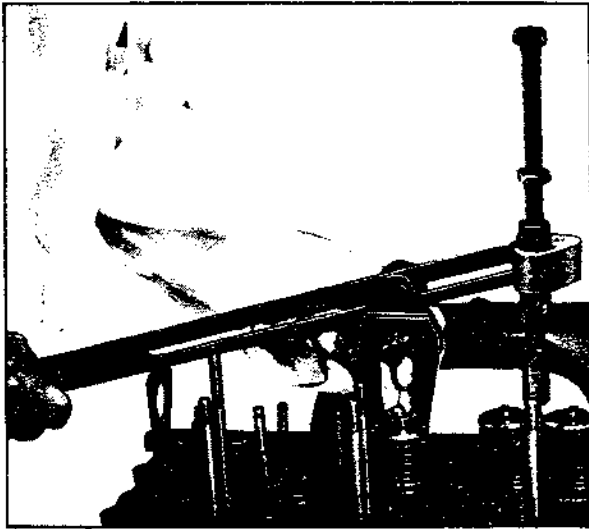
Compress valve springs and remove keepers (also called "collets")
